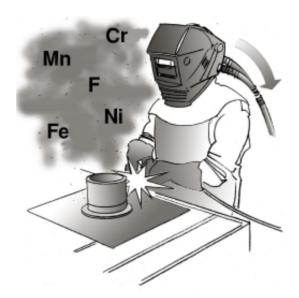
When welding in confined spaces where there is a risk that the concentration of fumes and gases could be too high, the welder must use breathing protection with a supply of clean air, which makes him/her independent of the surroundings
